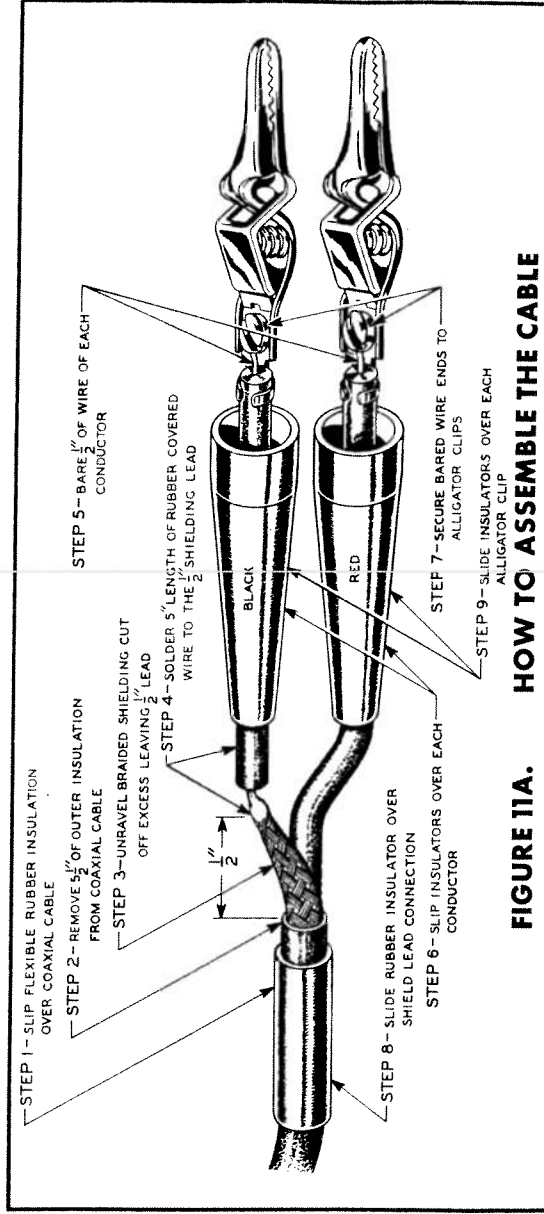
A. HOW TO ASSEMBLE THE CABLE
